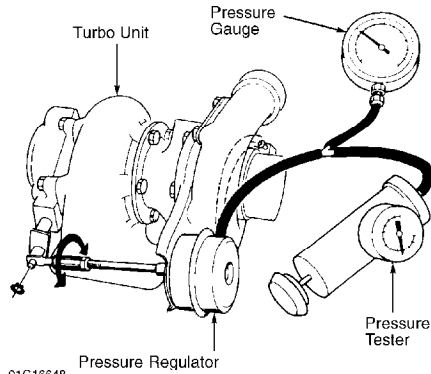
Adjusting Pressure Regulator Push Rod (Typical)
